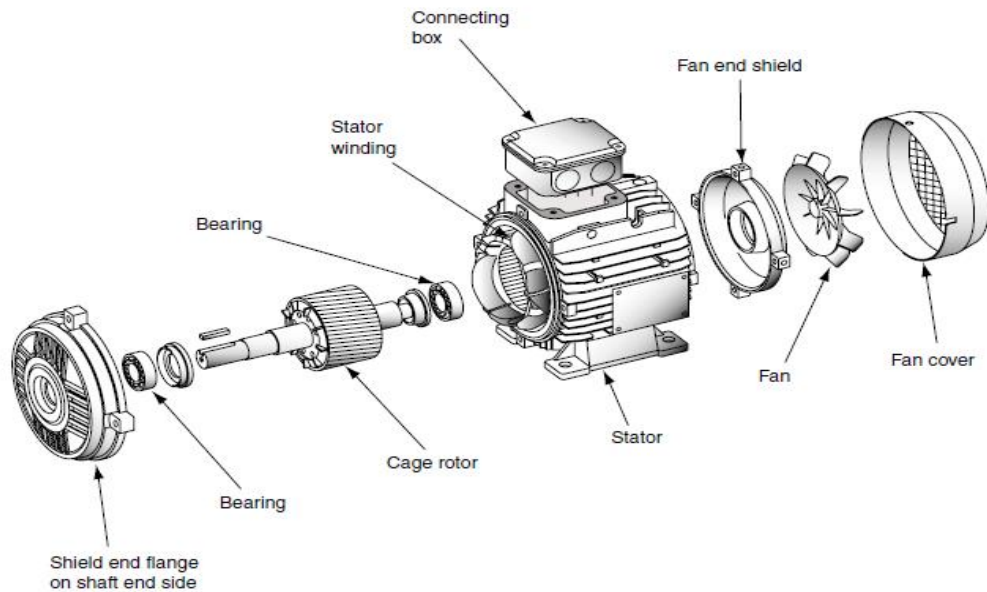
Exploded view of a squirrel cage rotor motor[03].
